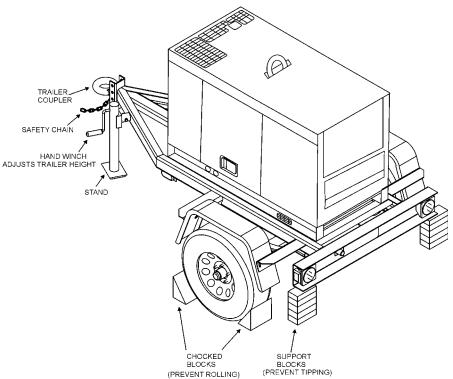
Welder/AC Generator and Towing Trailer
